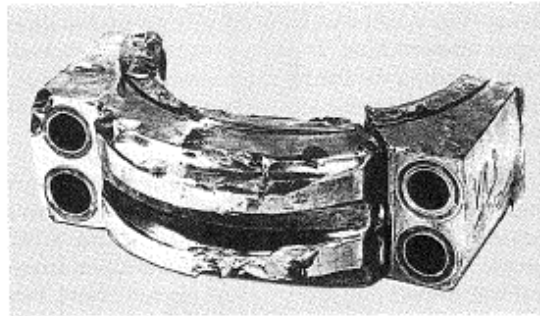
Connecting rod bearing cap with crack through fillet at nut surface.
